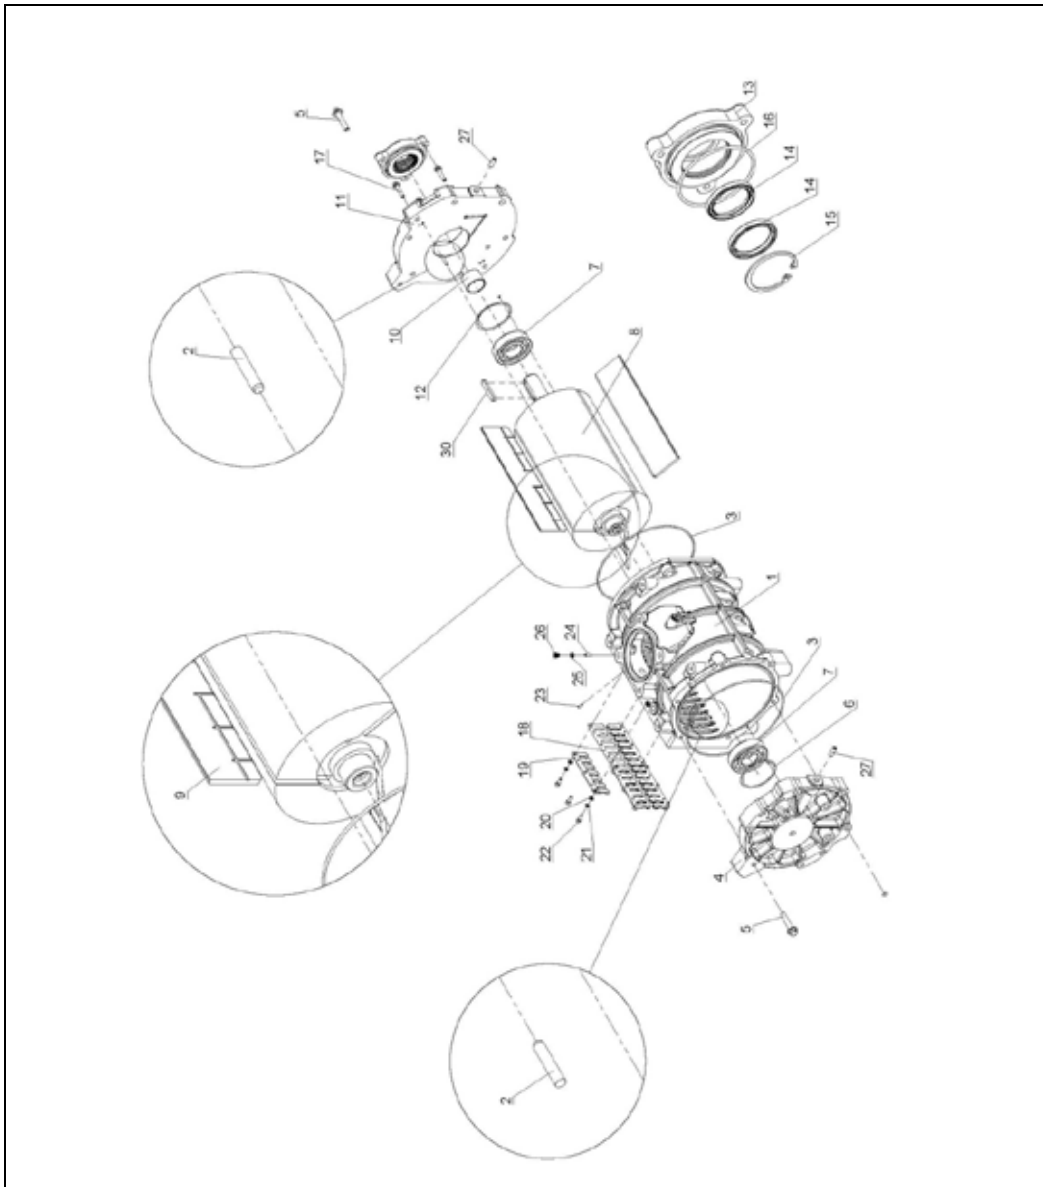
MS-631 Pump parts – Exploded View (3 of 4)
